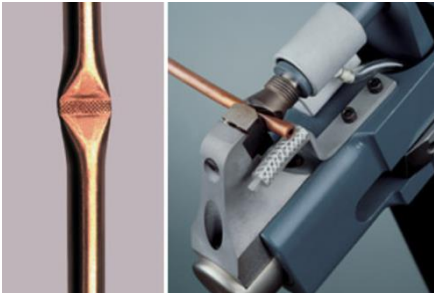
Copper fitting for welding (Source: Conex/Bänninger)
